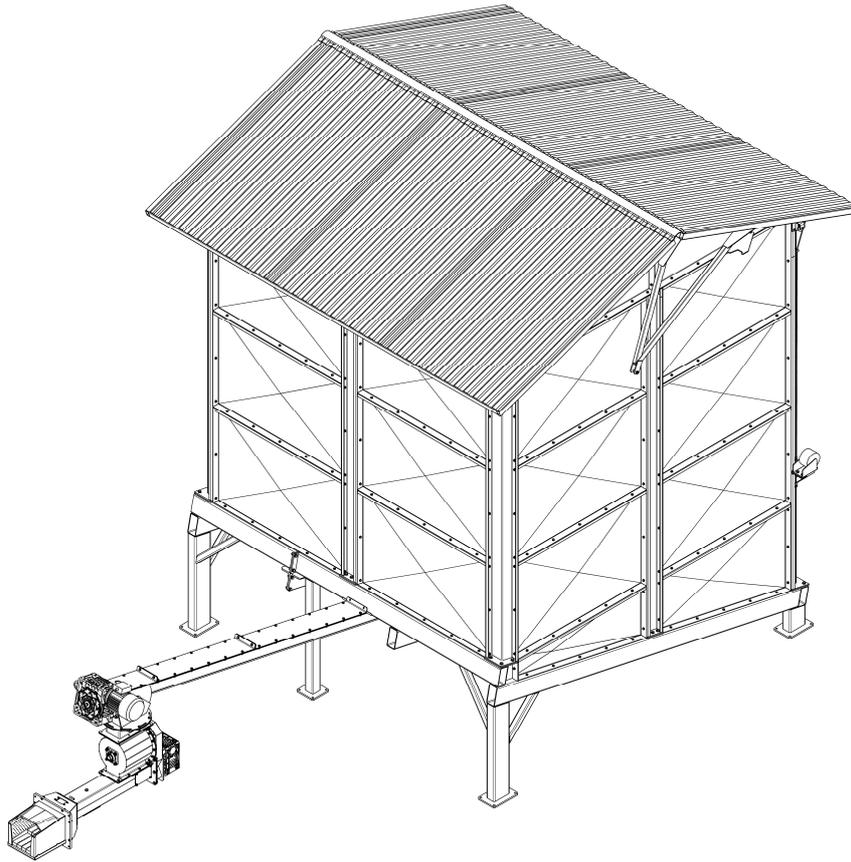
APSB set with a 27 m³ container and a 40 kW cast iron head.
